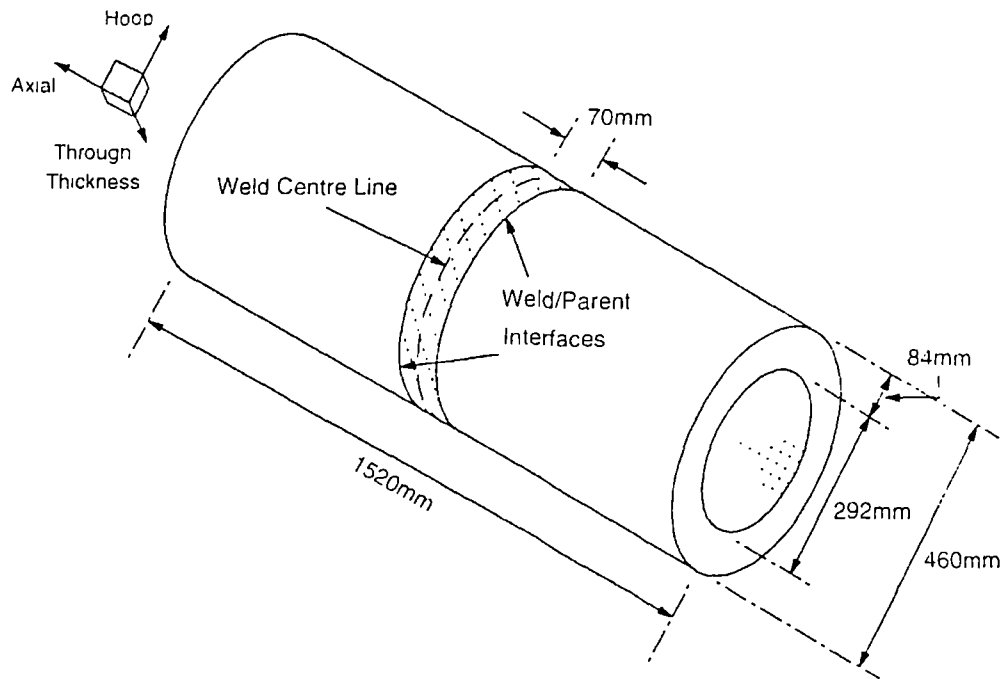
Schematic of thick weld stainless steel butt-welded pipe from Bonner [1996].
